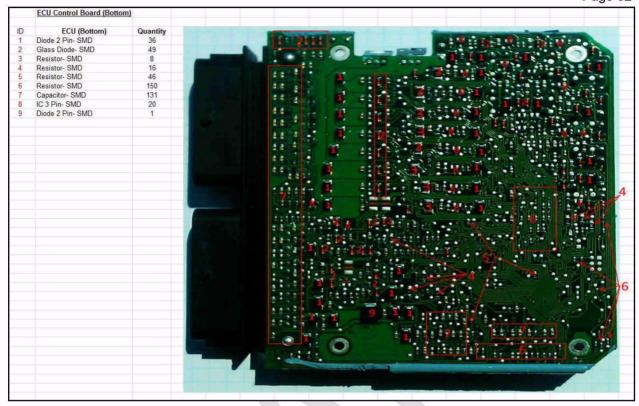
CNG ECU Board with Circuit ID numbers - Bottom
